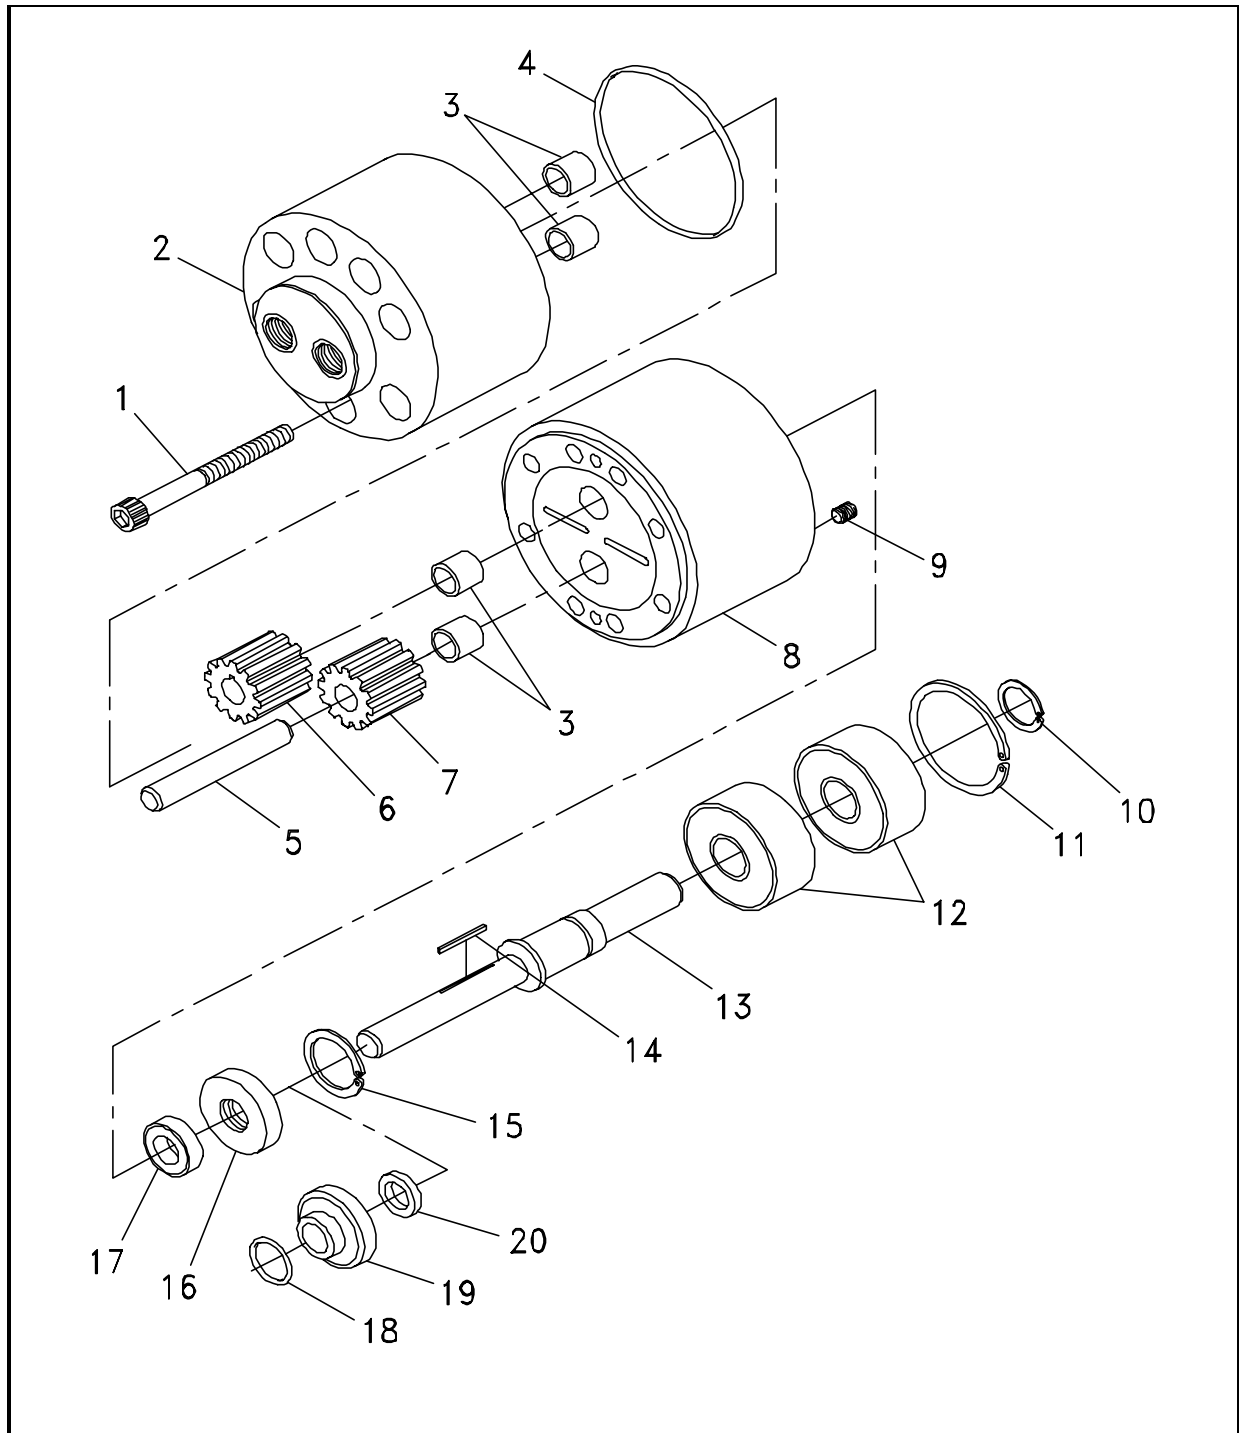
Motor 06858 and 21451 (Sheet 1).
